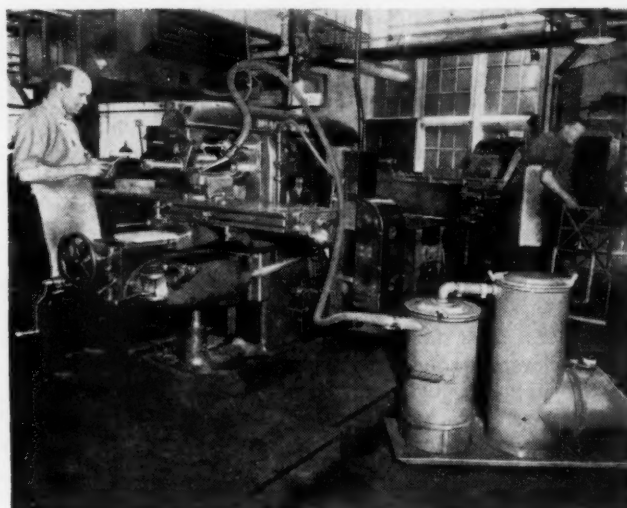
A DELICATE MILLING JOB WAS IMPROVED BY REMOVING CHIPS AT THE TOOL POINT BY USE OF AN INDUSTRIAL-VACUUM-CLEANER UNIT
